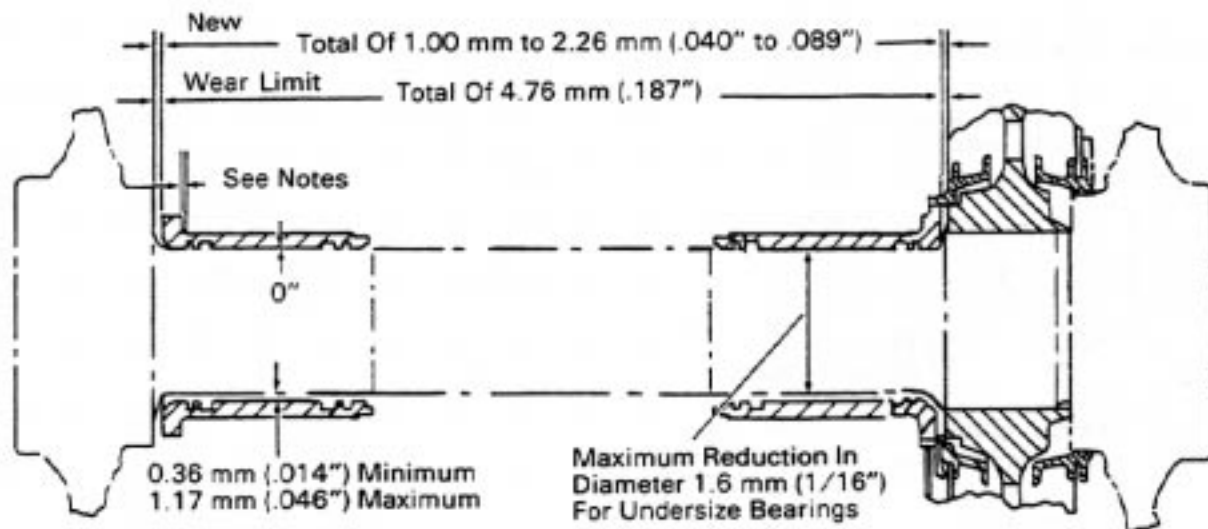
Support Bearing Cap Mounting Spot Face Remachining
